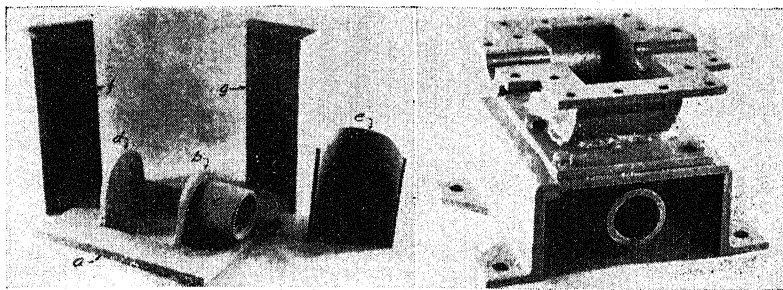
, left, parts of engine base; right, base completed and bolted to lower half of crankcase.
